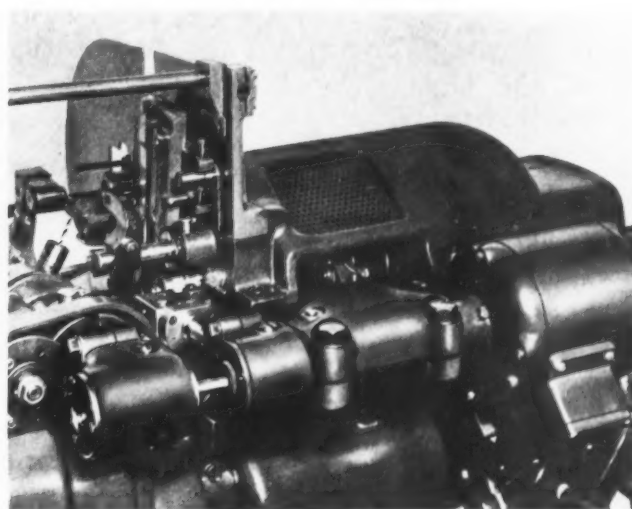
Motor Drive for Both Cross-drilling and Turret Drilling Attachments
